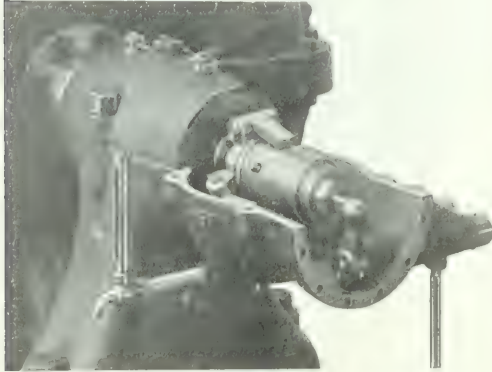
GOVERNOR AND BEARING OF SINGLE-STAGE TURBINE.
